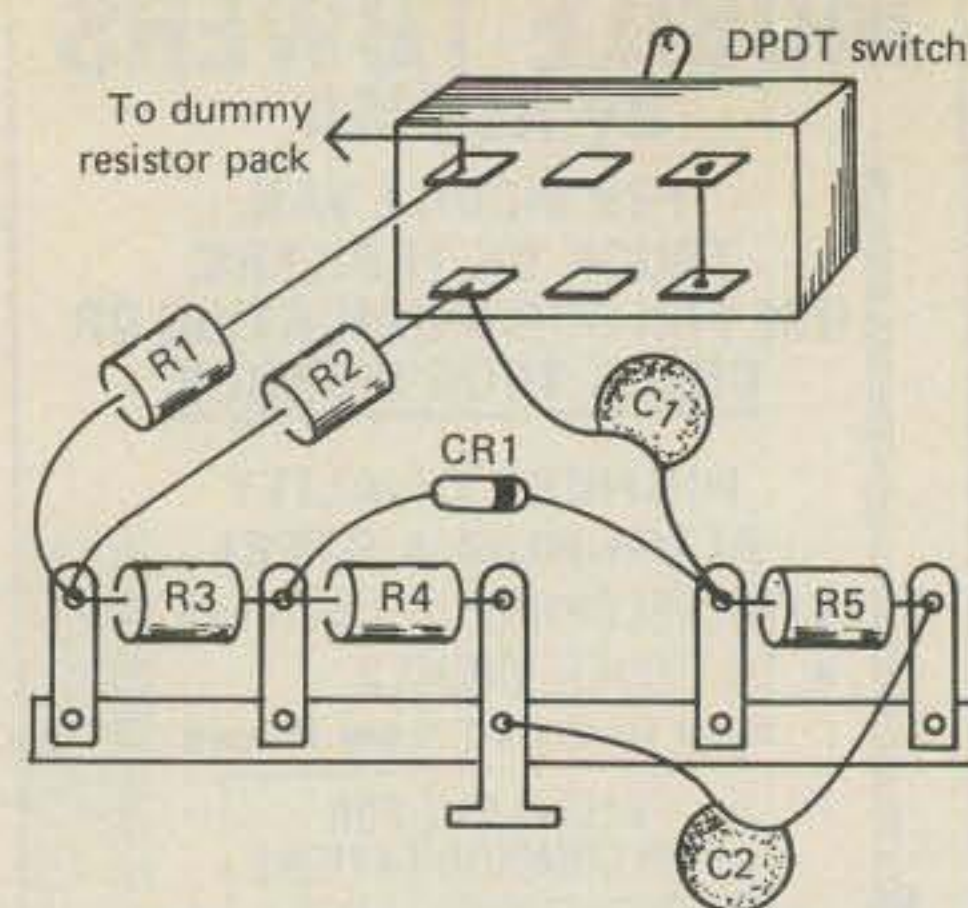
Partial parts placement detailing the short lead connections of the r.f. bridge components.
